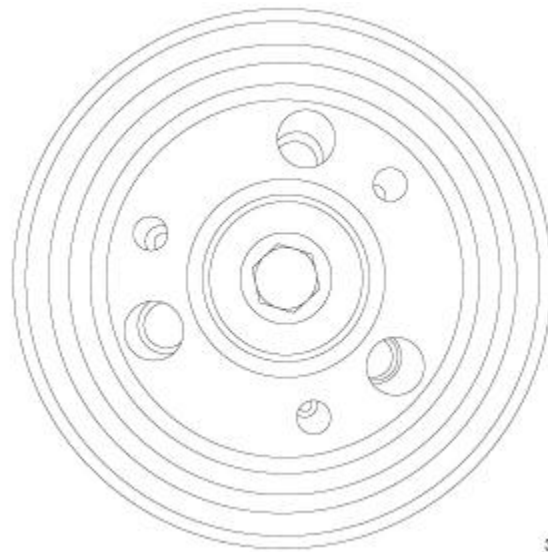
Crankshaft Damper & Harden Steel Bolt
